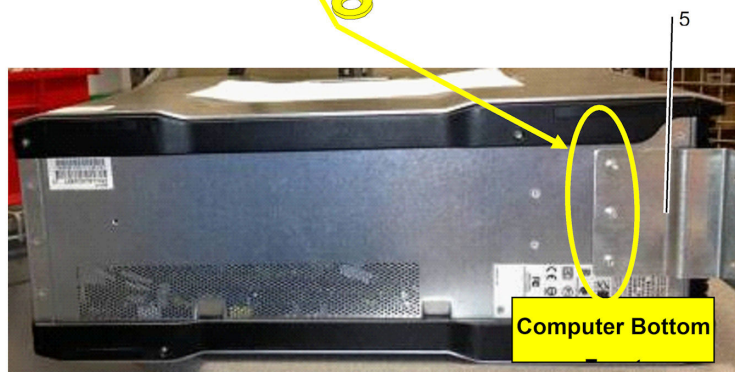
Install Computer top front and bottom front brackets - Part II
